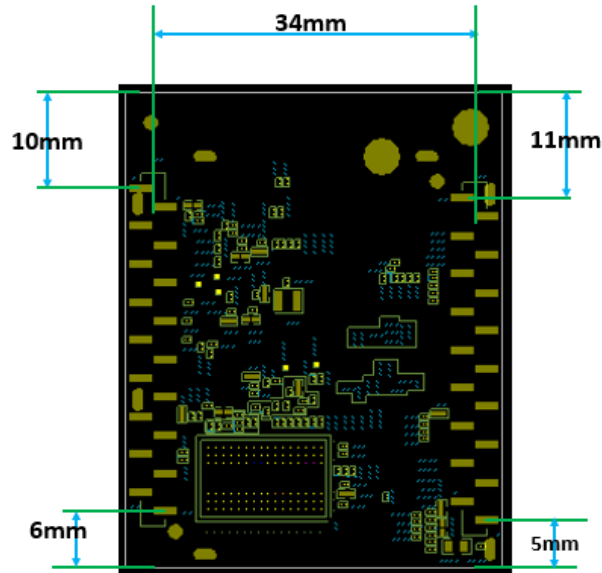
LS9X-AC11DBT MODULE Bottom View Mechanical Dimension
